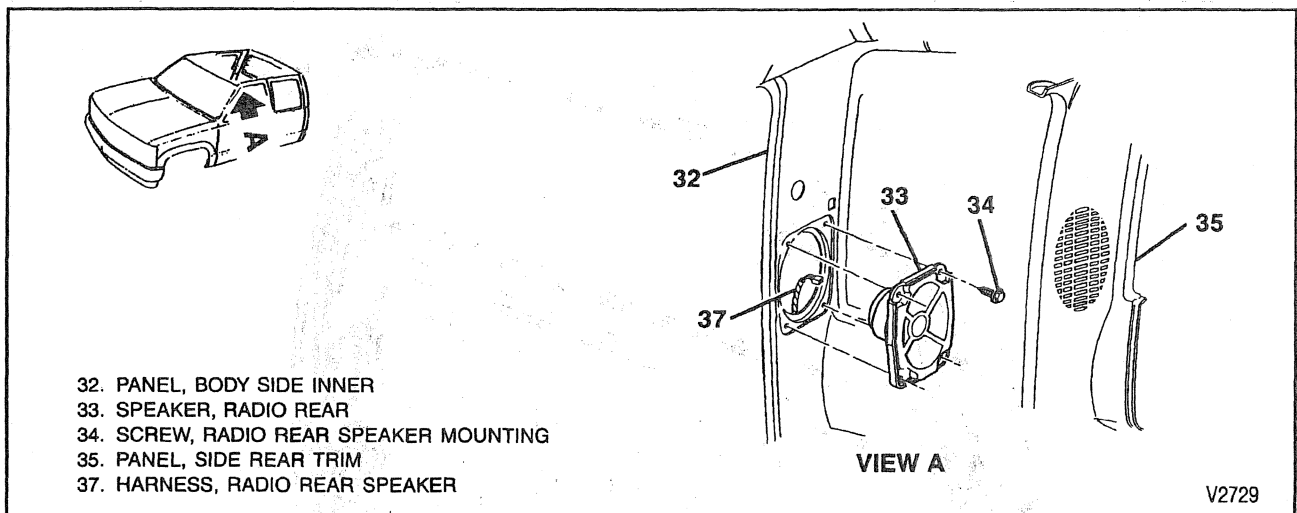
Rear Speaker Assembly (Extended Cab/Crew Cab Models)
